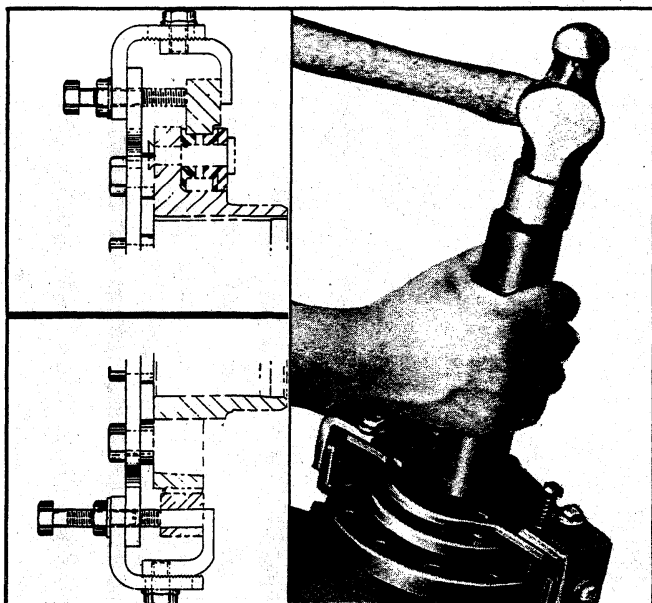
V - Installing Torsional Damper (283, 327 and 350)
